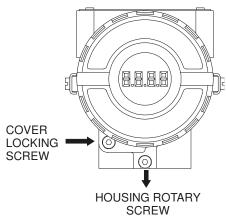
Cover Locking and Housing Rotation Set Screw
